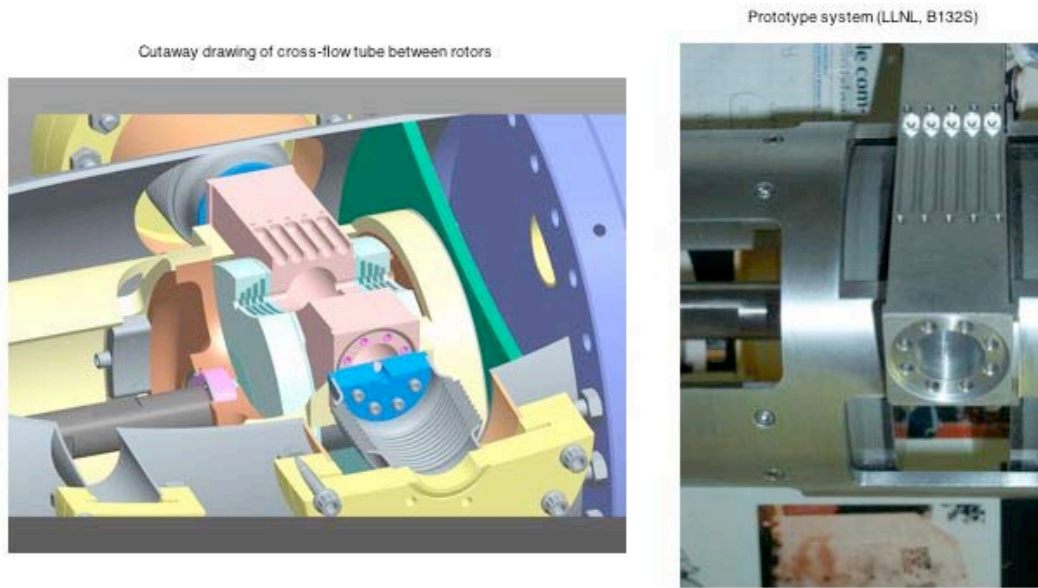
Cutaway drawing and photograph of cross-flow region in endstation flanked by baffled rotors. One of the primary goals in designing and fabricating these initial test units was to verify that we could achieve a gap spacing of $\leq 0.002''$ between these components. Note that the venturi that would normally be used in an actual production unit has been replaced here by a simple rectangular tube with a straight throat for use in tests with static gas.
